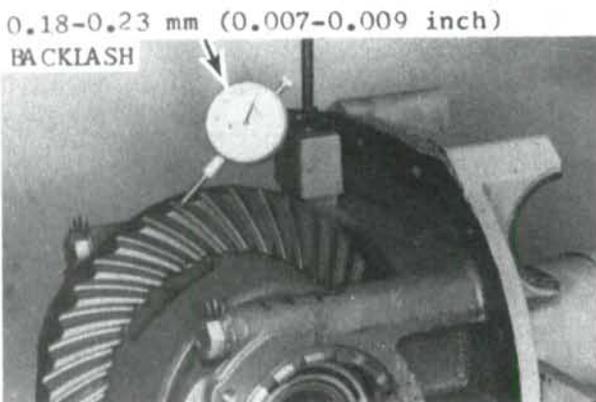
View showing proper placement of dial indicator for setting backlash in front drive differentials.
